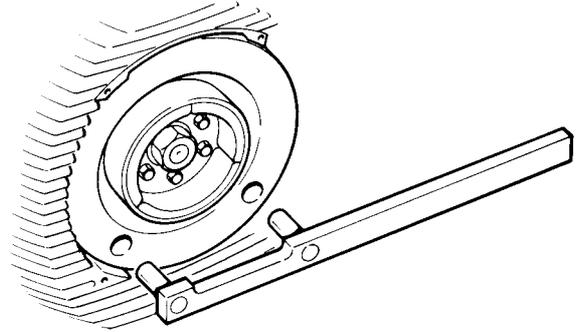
Using Flywheel Restrainer Part No 50-0231
